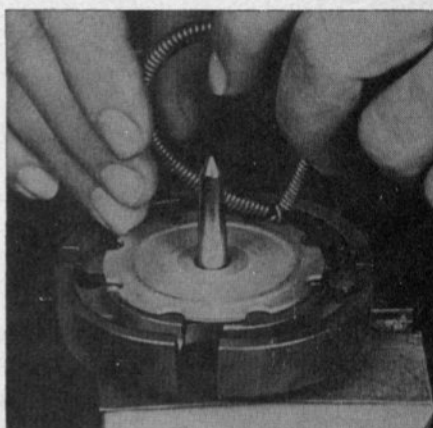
To assemble clutch, clamp a punch or rod in vise, set rotor down over punch or rod and set clutch shoes in place. The clutch spring can then easily be installed as shown in Fig. MC3-17.
